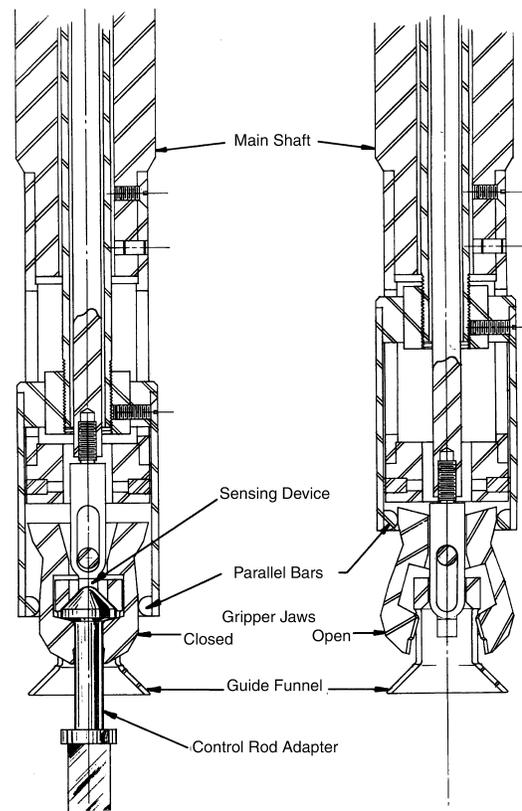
CONTROL ROD GRIPPER MECHANISM.
